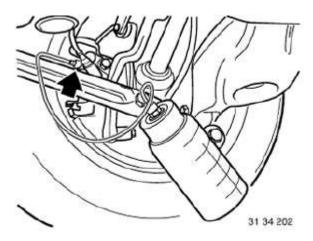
Locating Bleeder Valve Courtesy of BMW OF NORTH AMERICA, INC.
